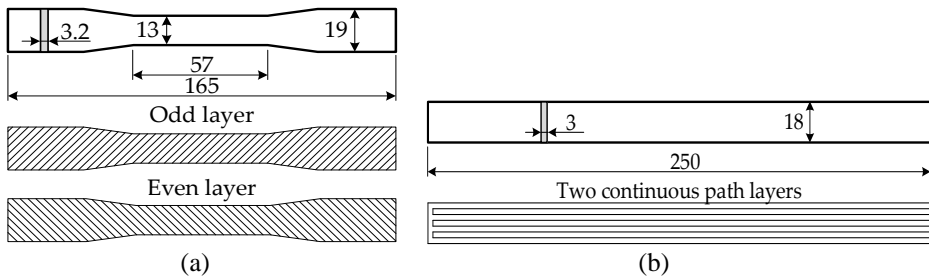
Sample dimensions (in mm) and printing layout: (a) unreinforced specimen; (b) reinforced plate
